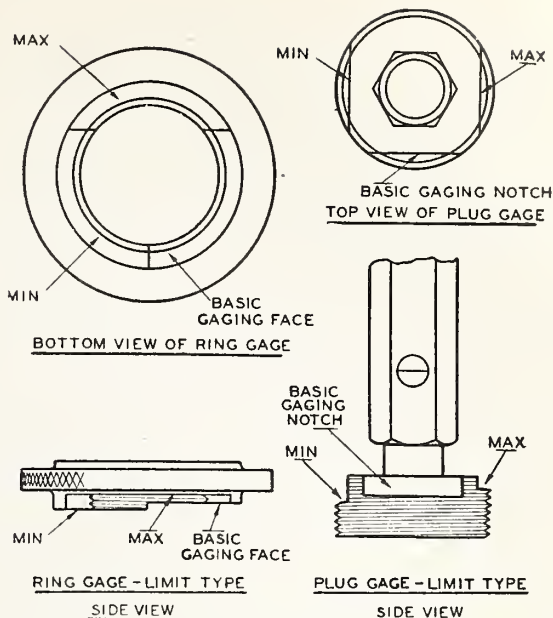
Limit type of taper pipe thread plug and ring gages.
